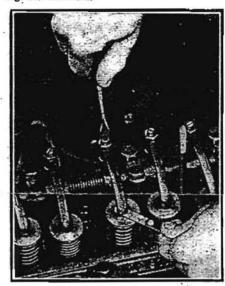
When the lock-nut is released, the valve clearance can be set by rocating the adjustment screw with a screwdriver and checking with a feeler gauge to .019in.
